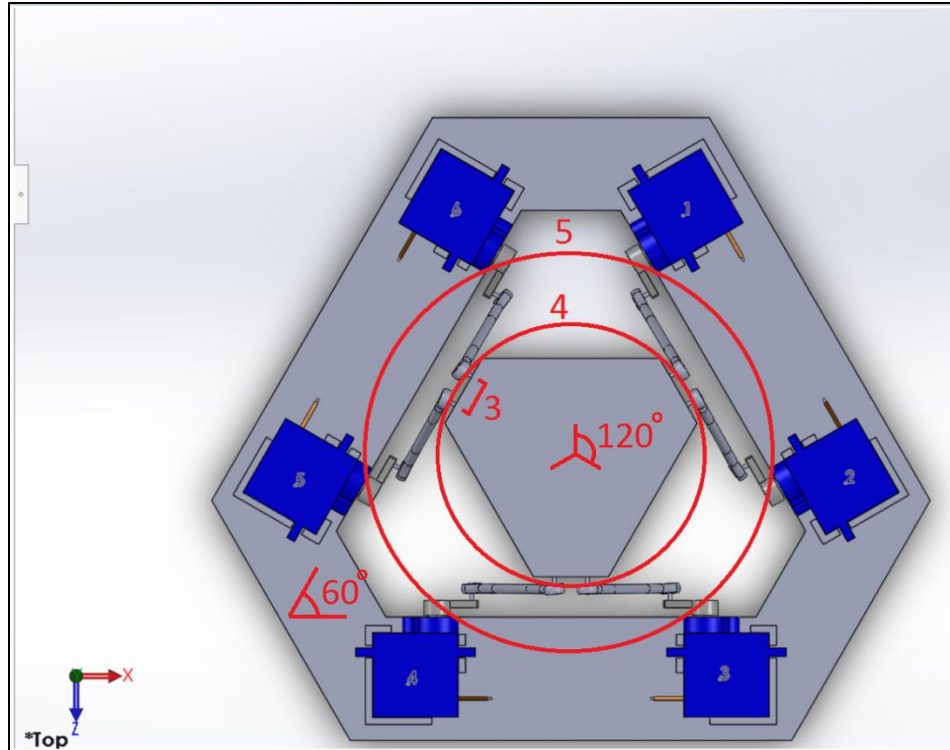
Top View of Scale Model Assembly with Dimension Indications
